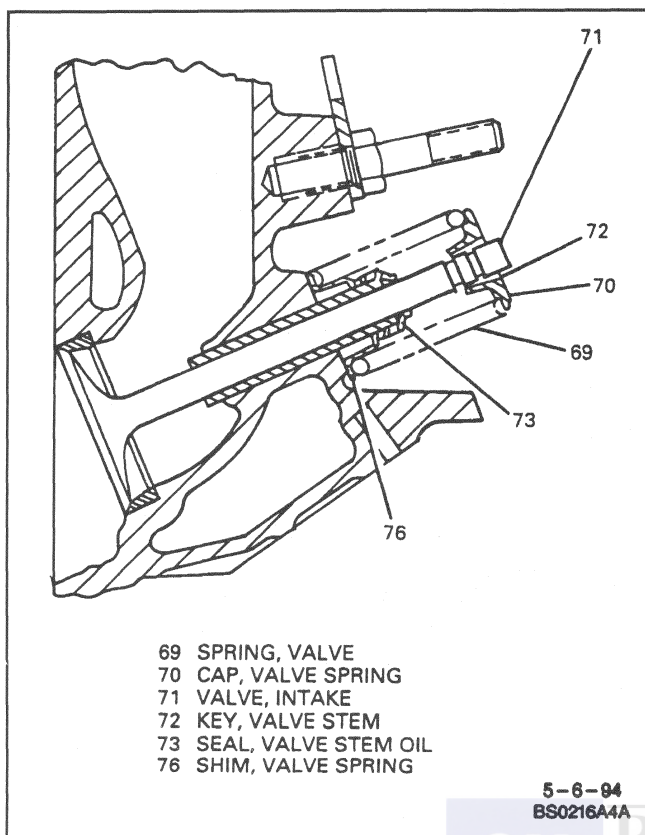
Valve (Intake Shown, Exhaust Similar)
